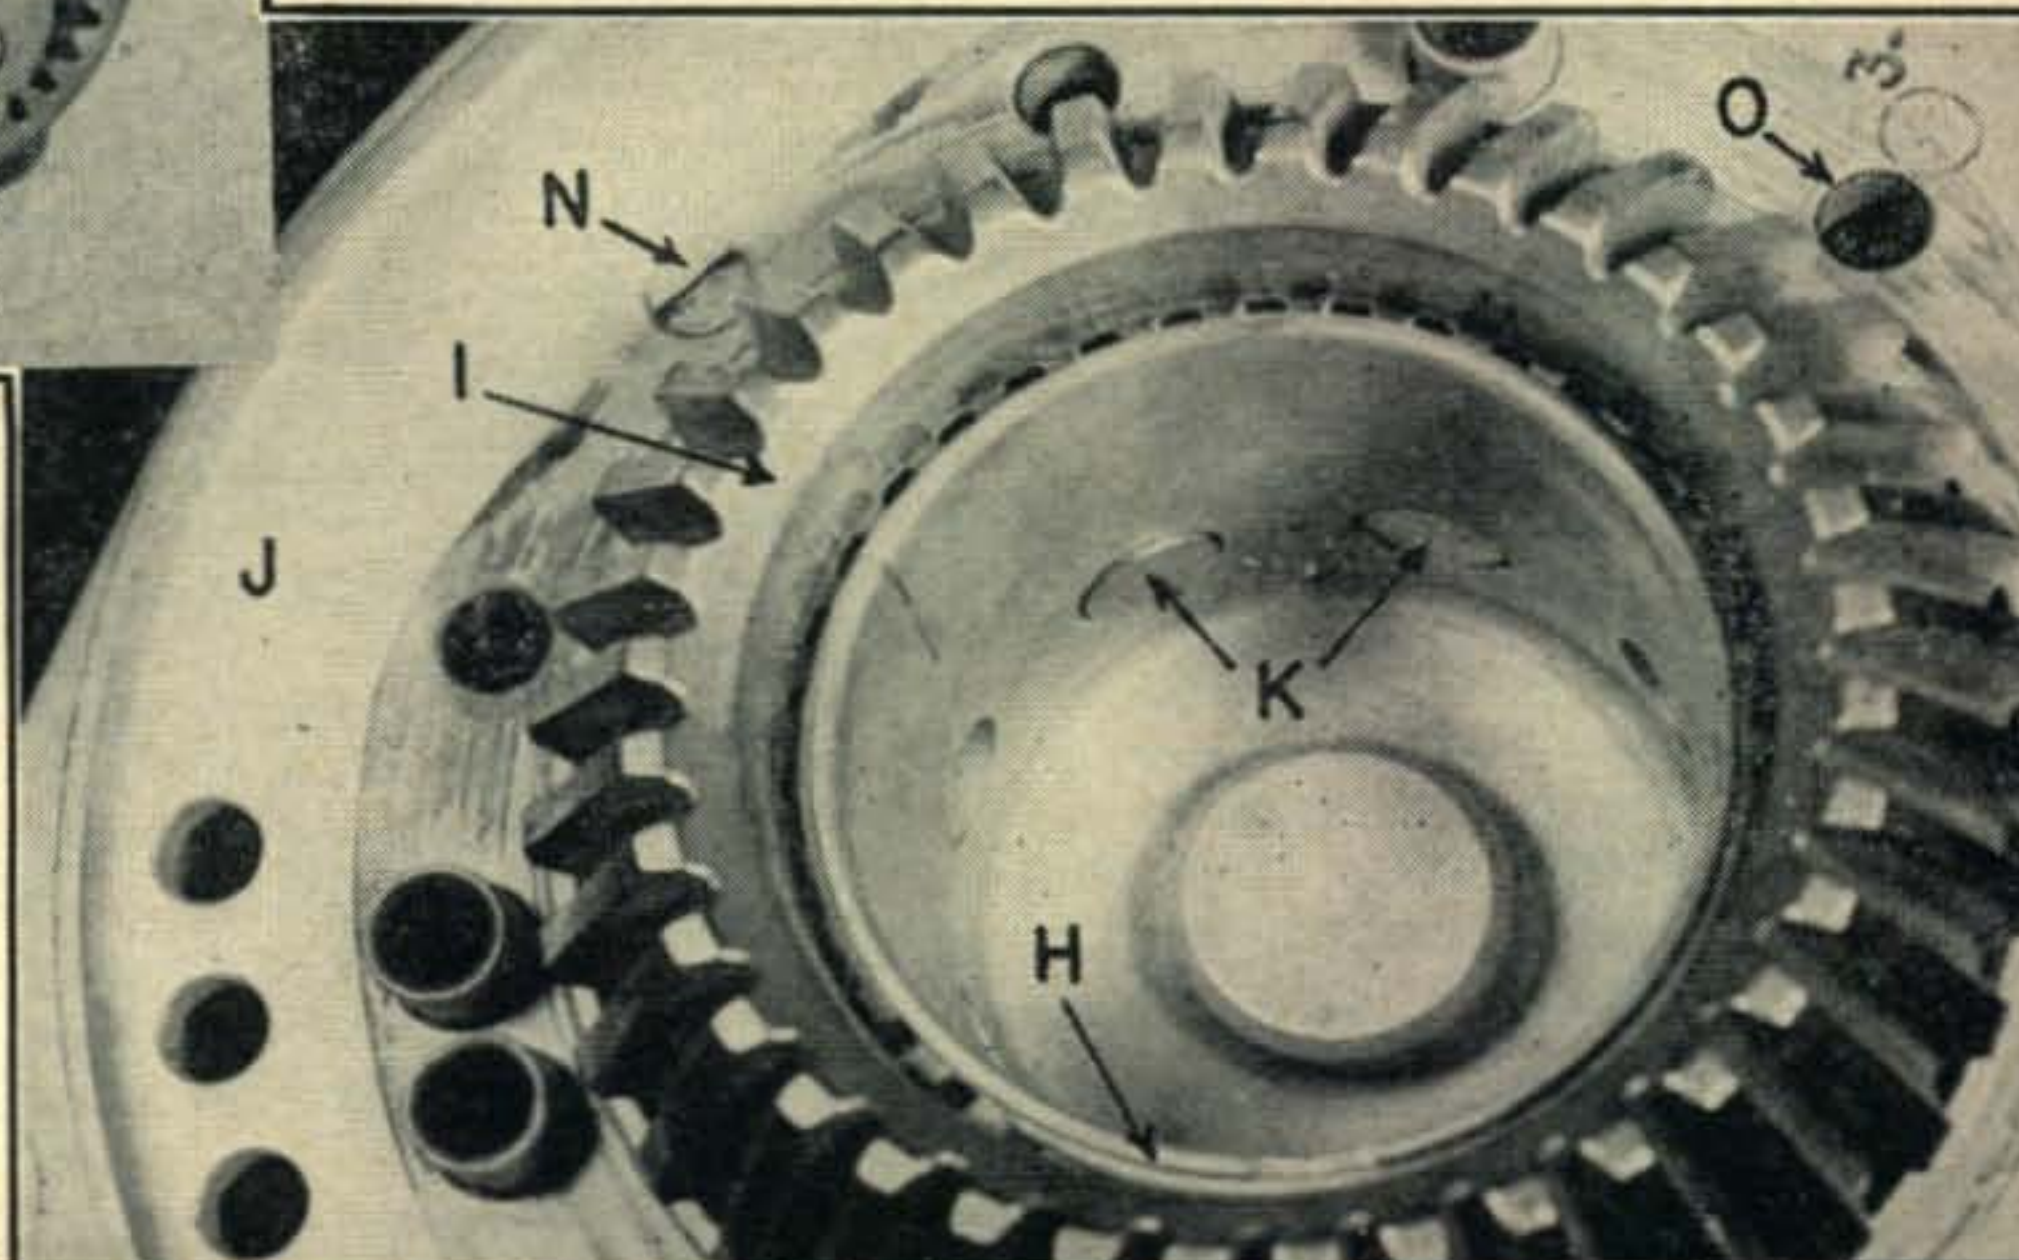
(right). Retaining ring *H* is removed, followed by bevel gear *I* and steel mounting plate *J*. Plugs *K* are accessible for removal through discarded plug *B* mounting hole.
